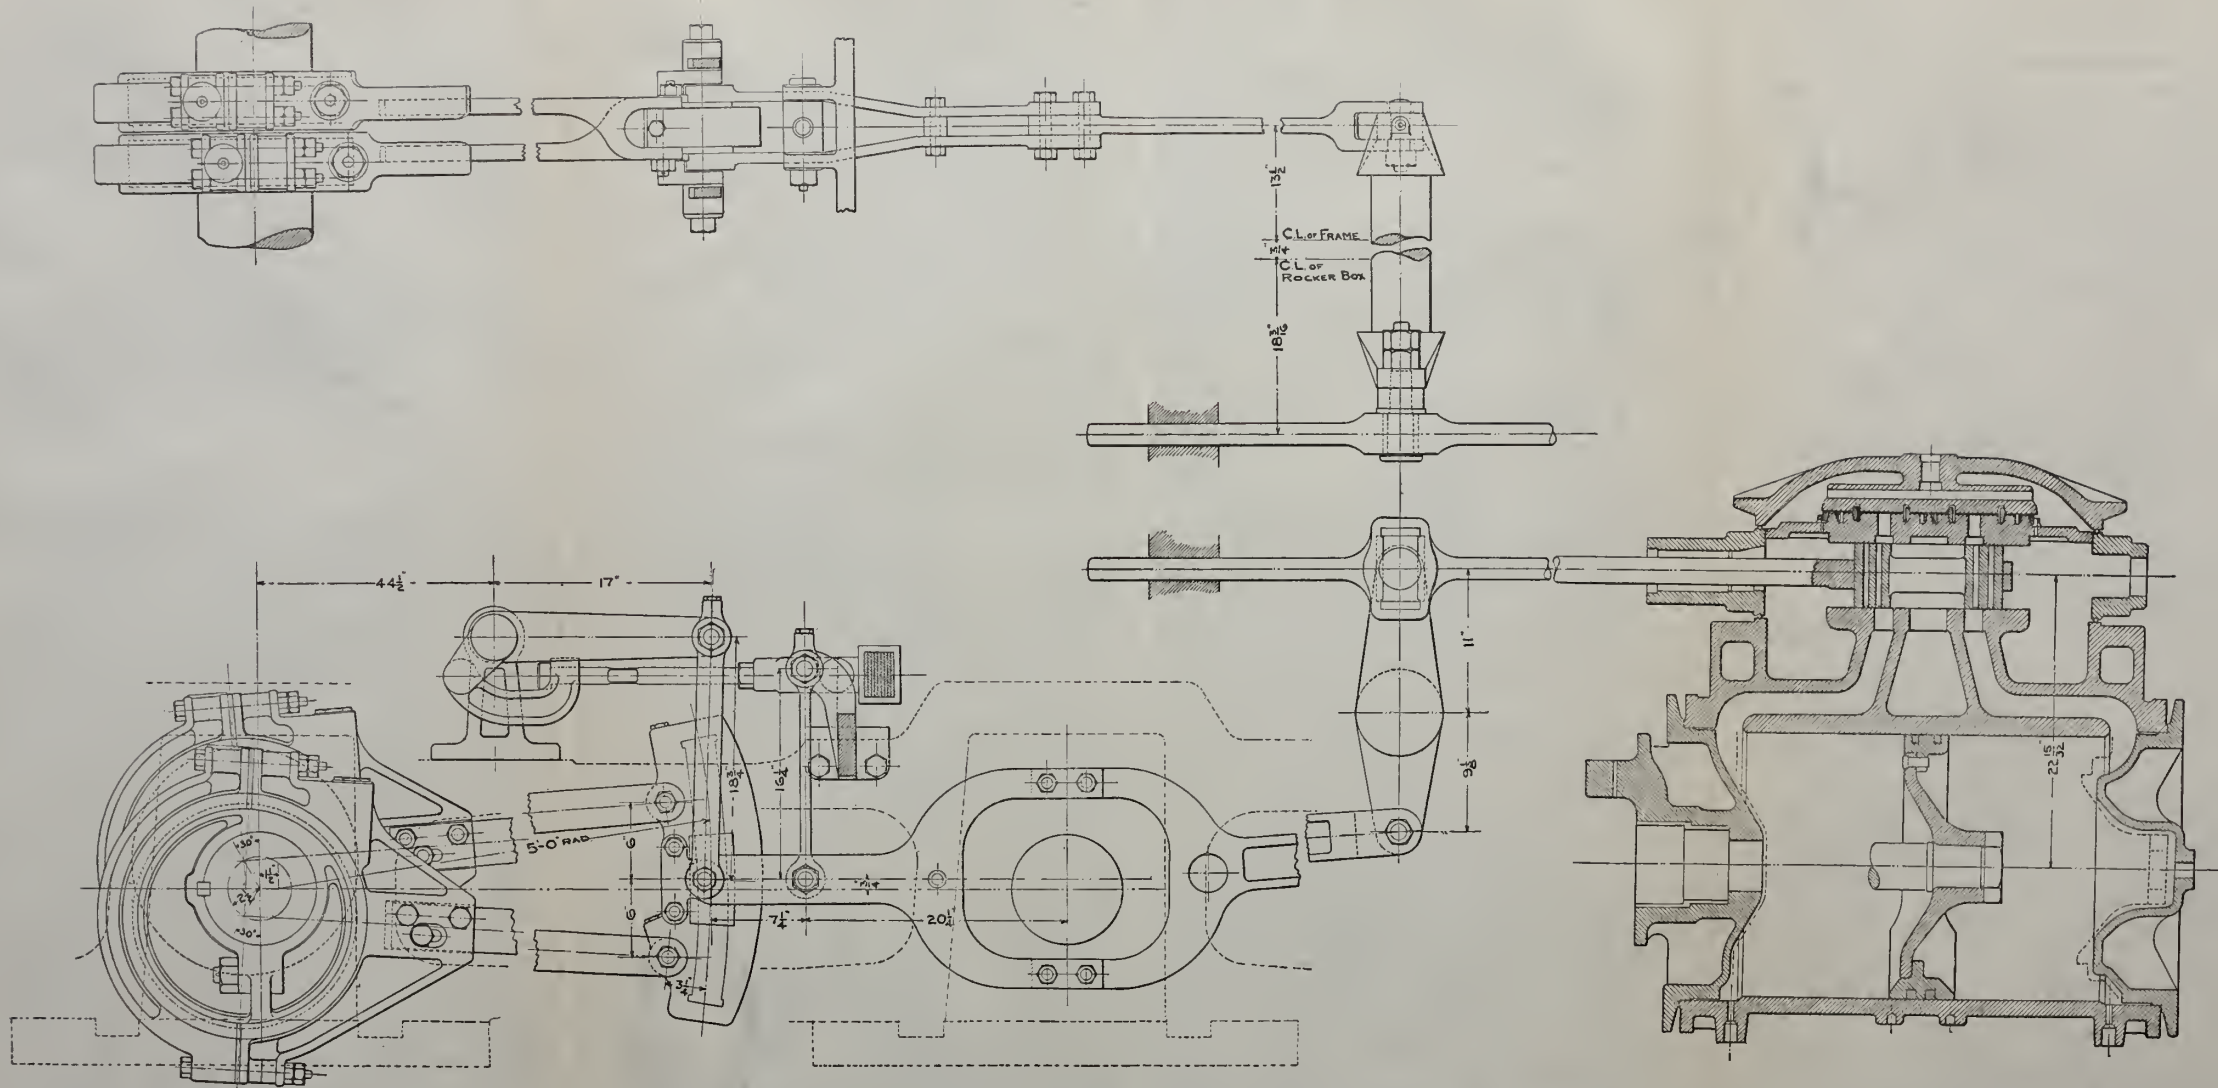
VALVE GEAR, LOCOMOTIVE No. 5266.
